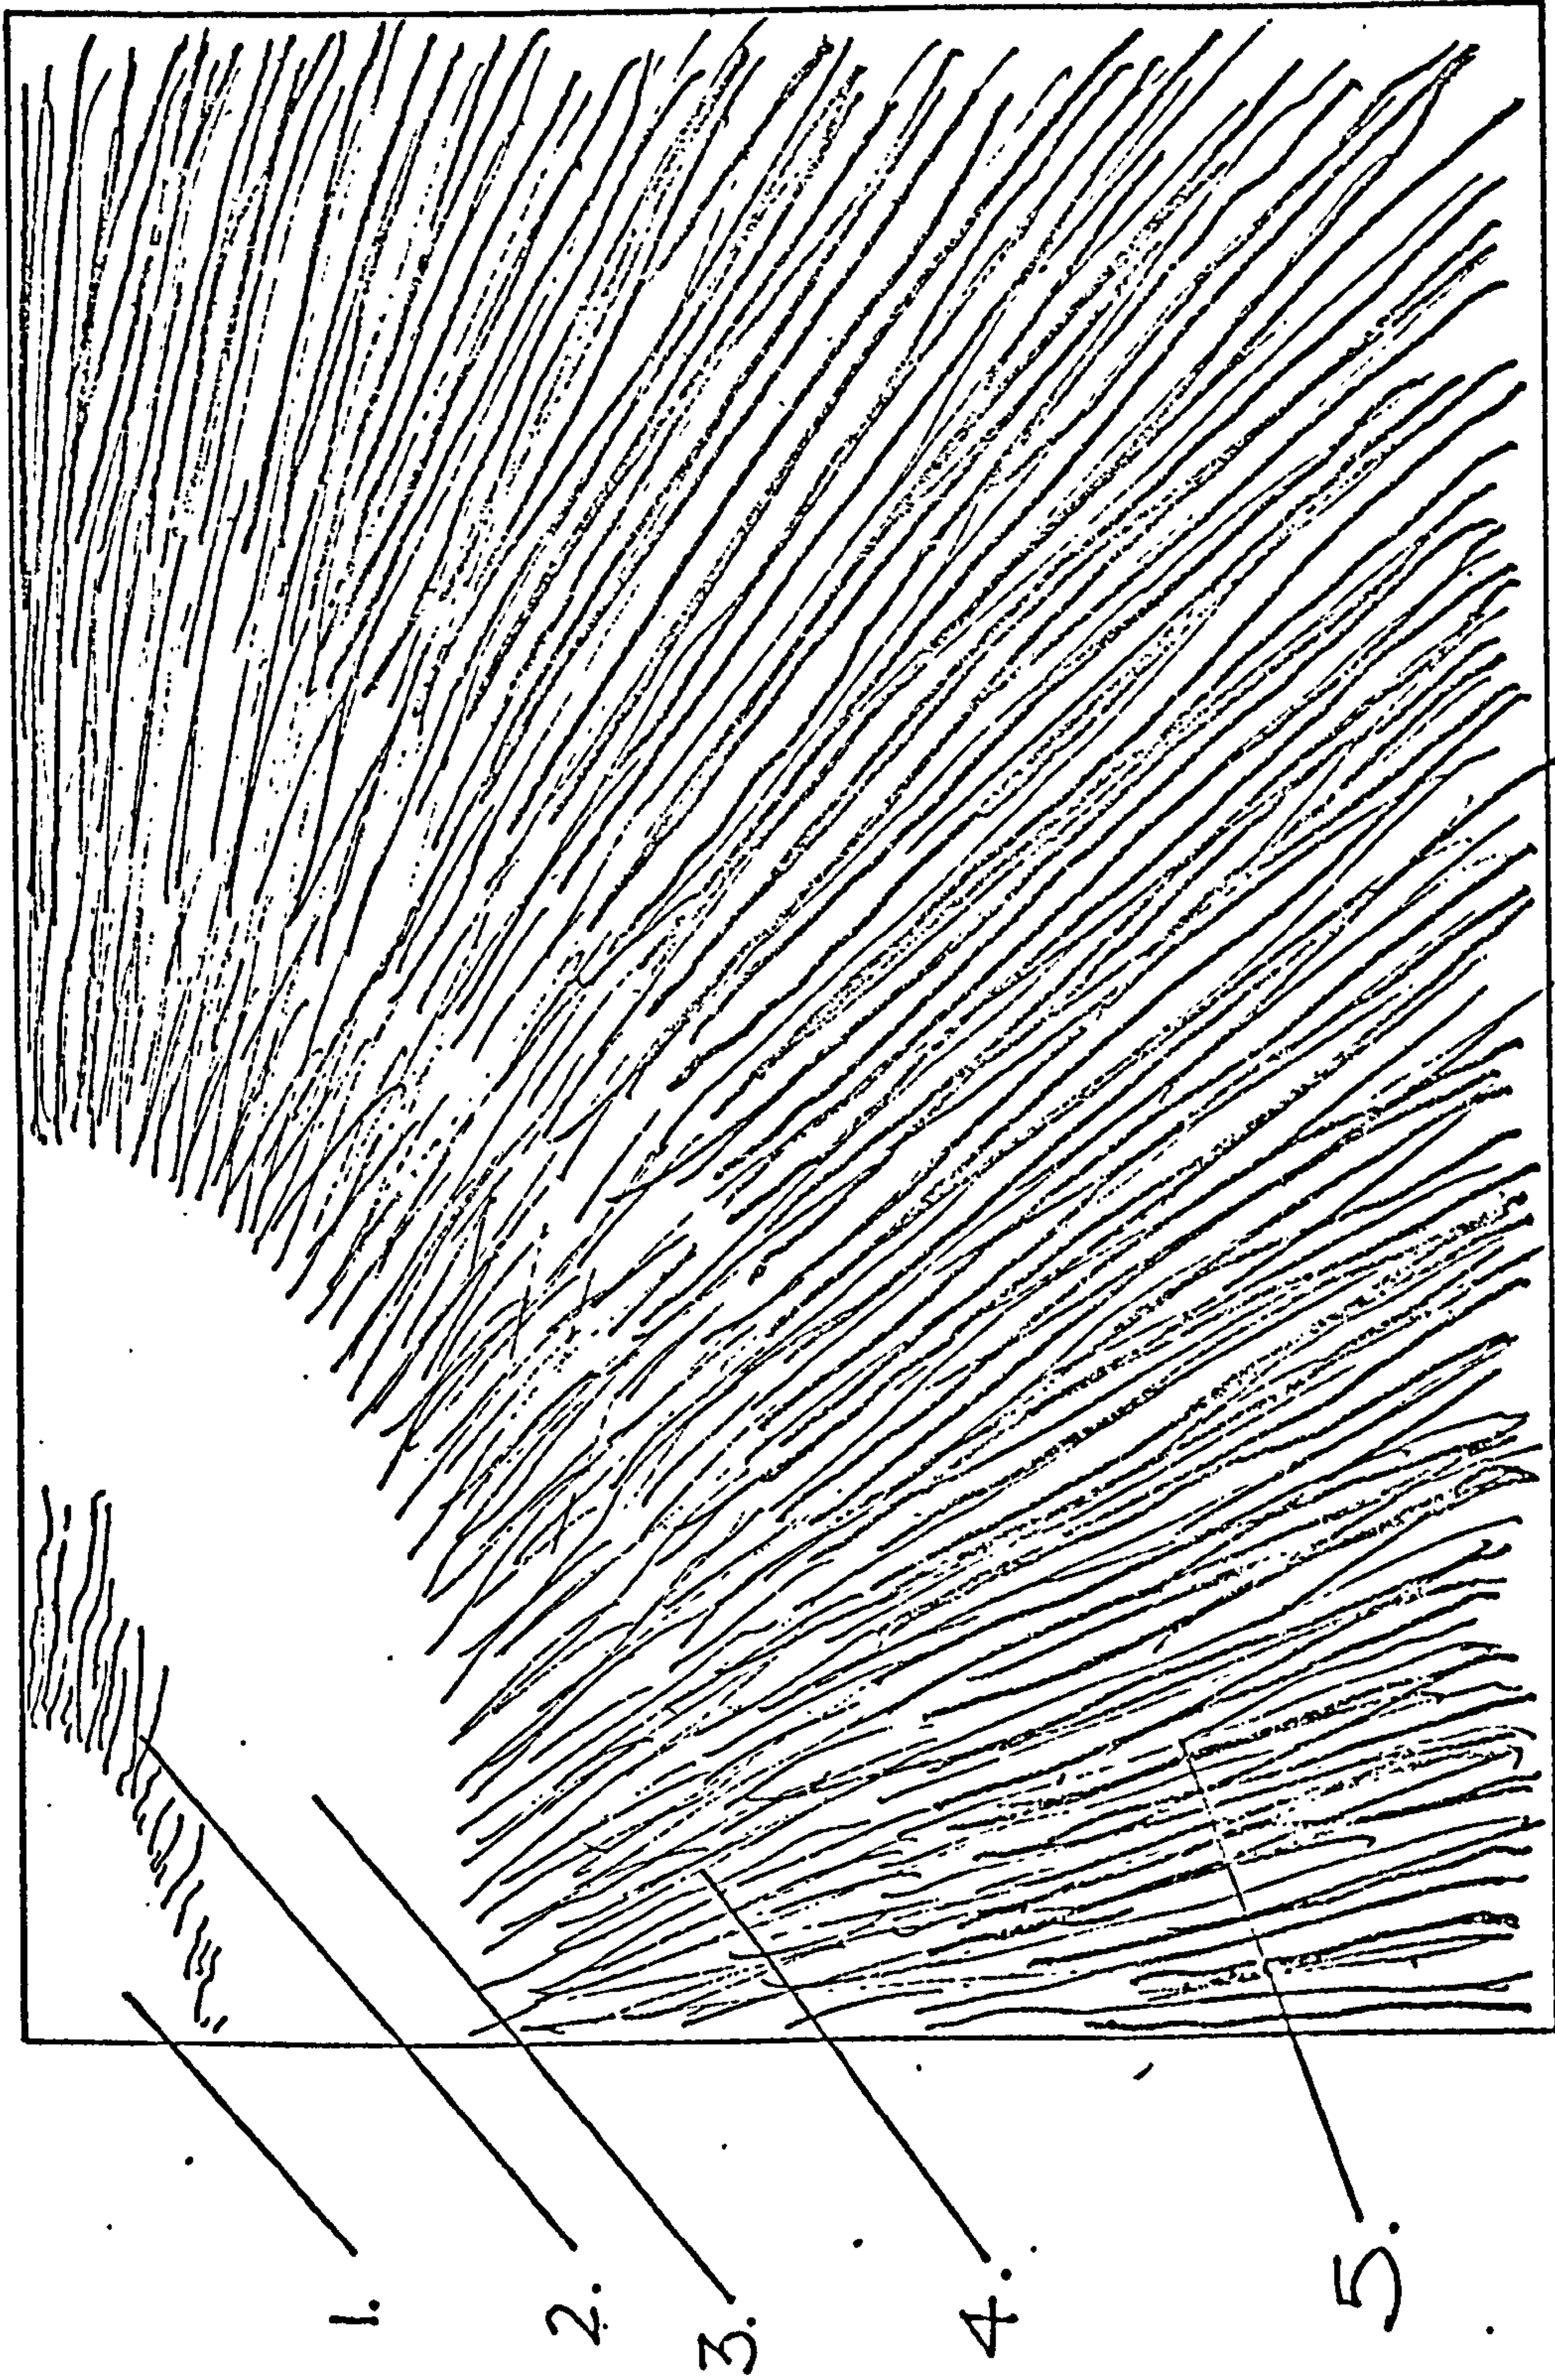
Schematic representation of the fracture surface markings
